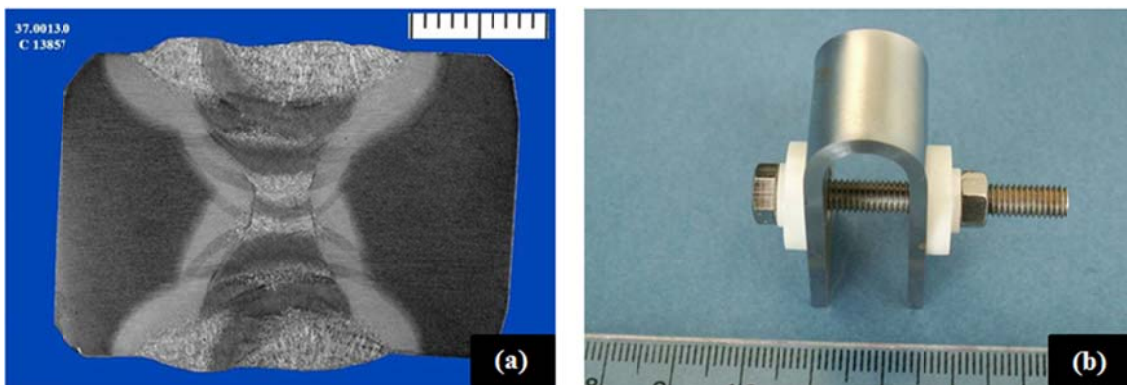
Corrosion coupons manufacturing: (a) A516 Gr70 welded coupon before testing, (b) A516 Gr70 U-bend coupon for SCC and crevice corrosion susceptibility evaluation
